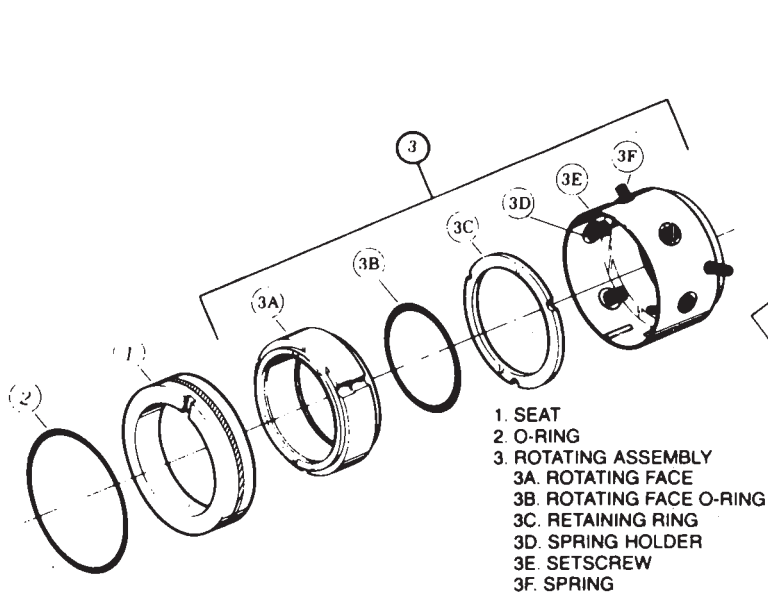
Crane Type 21 Mechanical Seal - Clamped Seat
